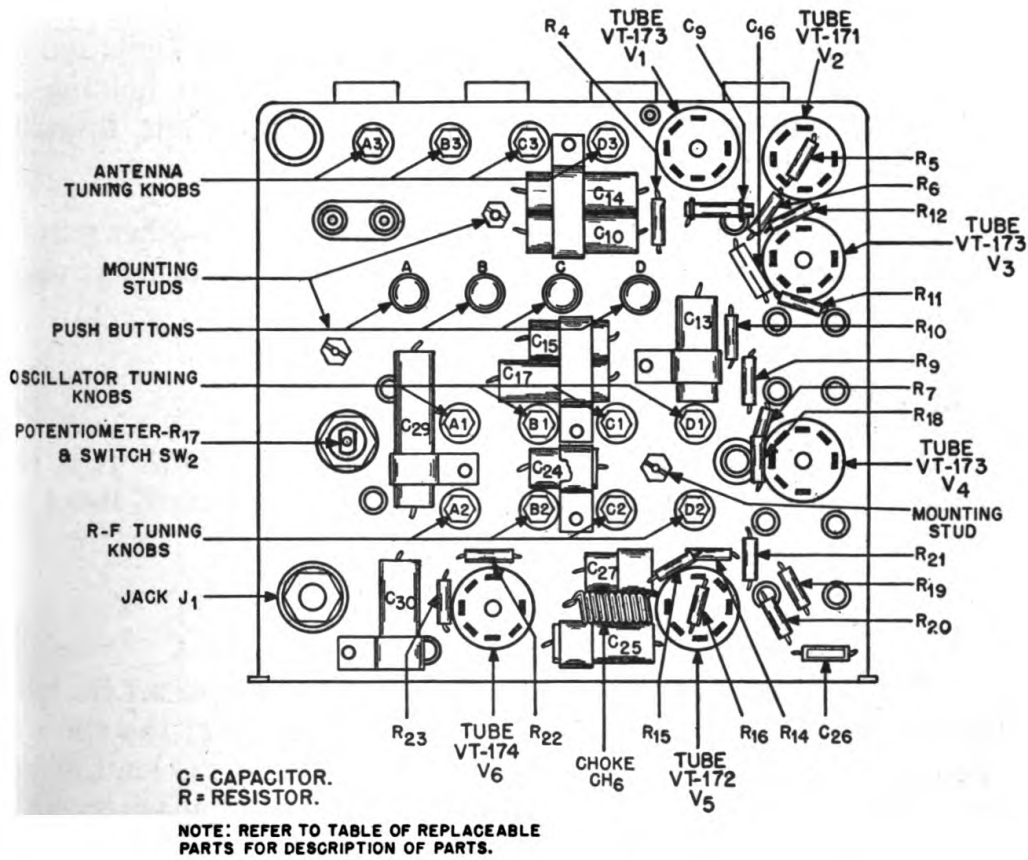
RADIO RECEIVER BC-728-A, CHASSIS—
